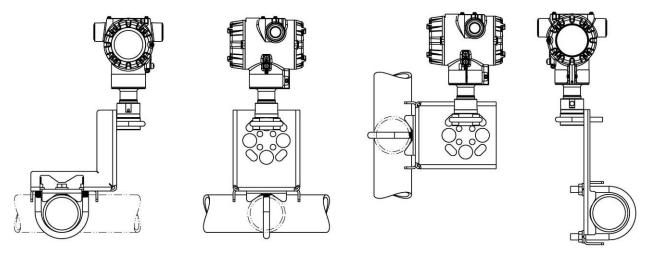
Typical mounting dimensions of STA722 & STA740 for reference
